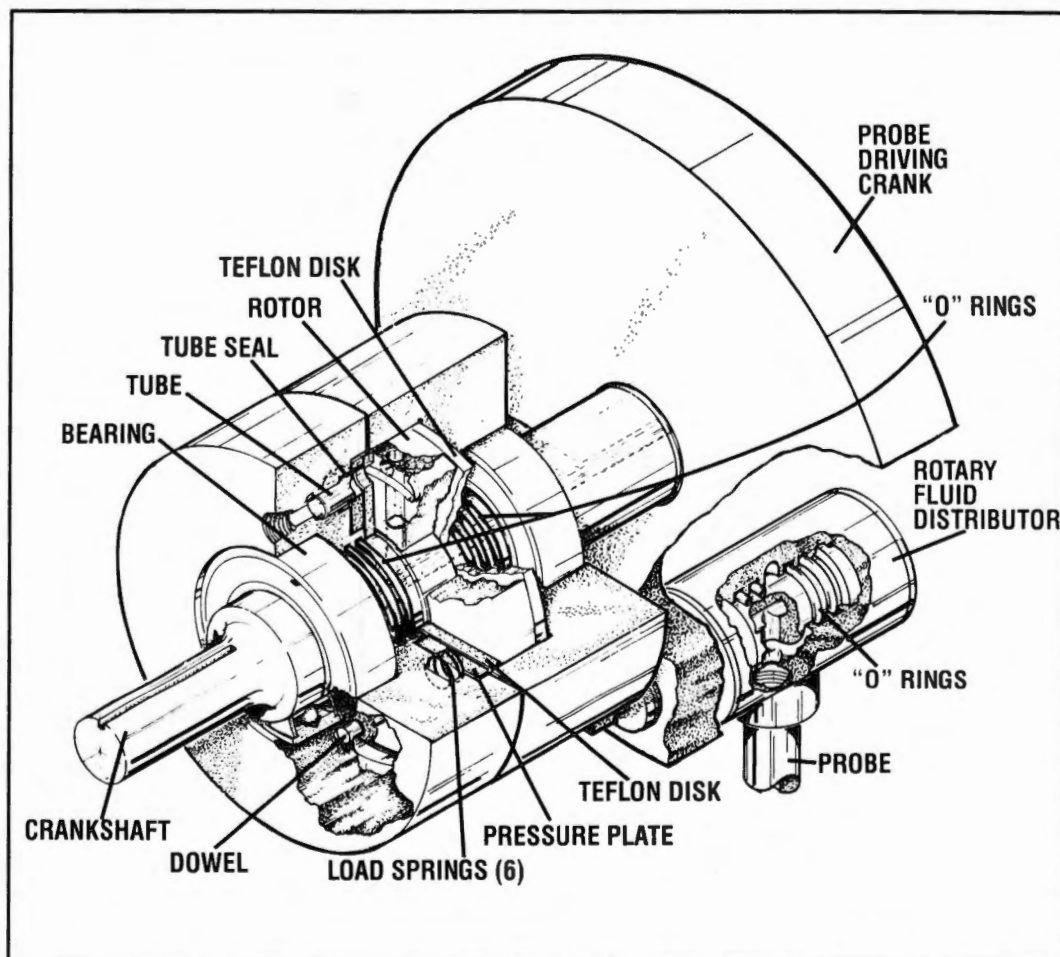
Sectioned perspective view of rotary fluid injection timing meter and rotary fluid distributor.
